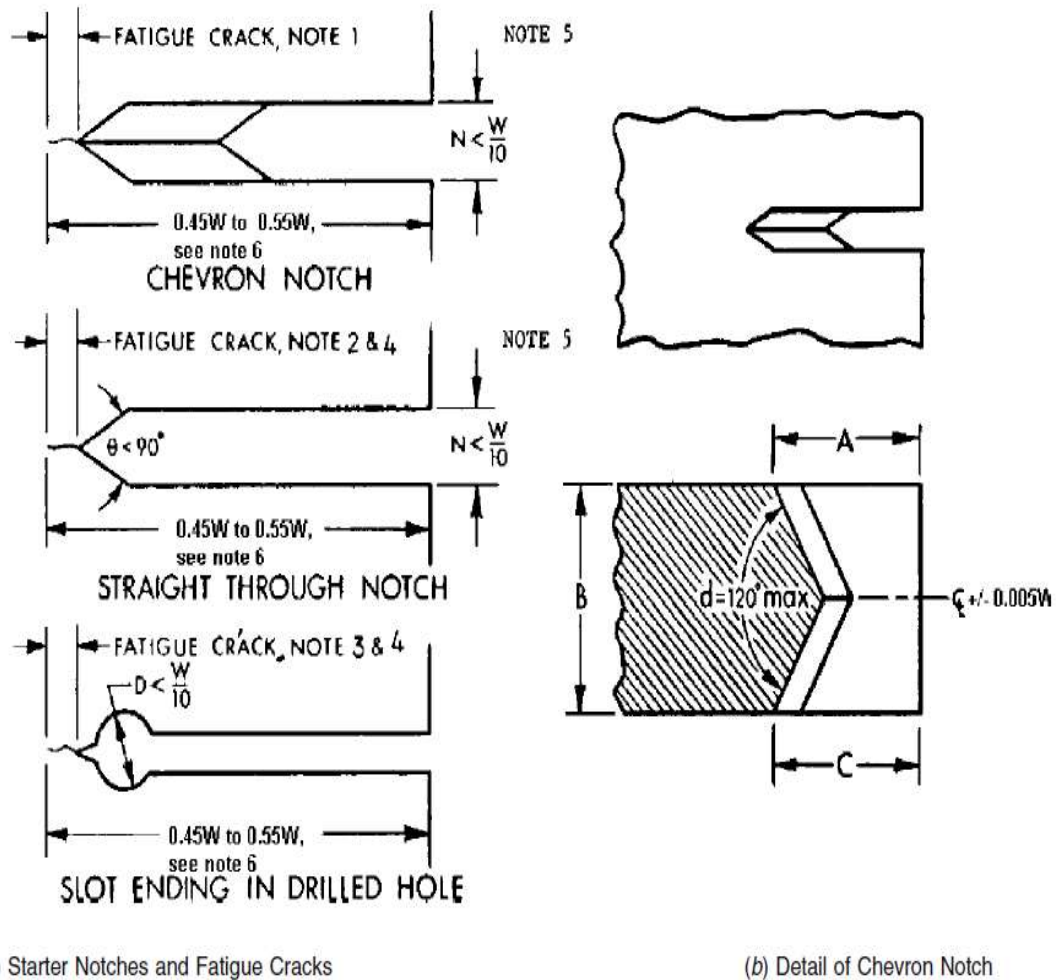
Crack starter notch and fatigue crack configurations. [90]
